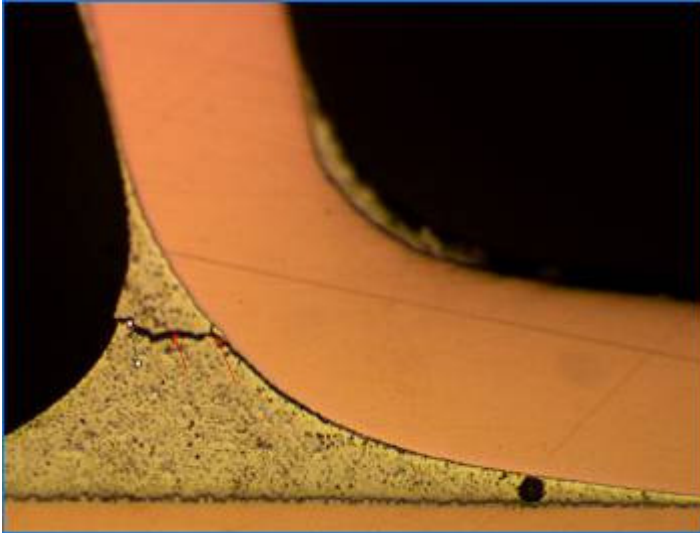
cross section, SN63, U31, right lead solder crack, 200x
